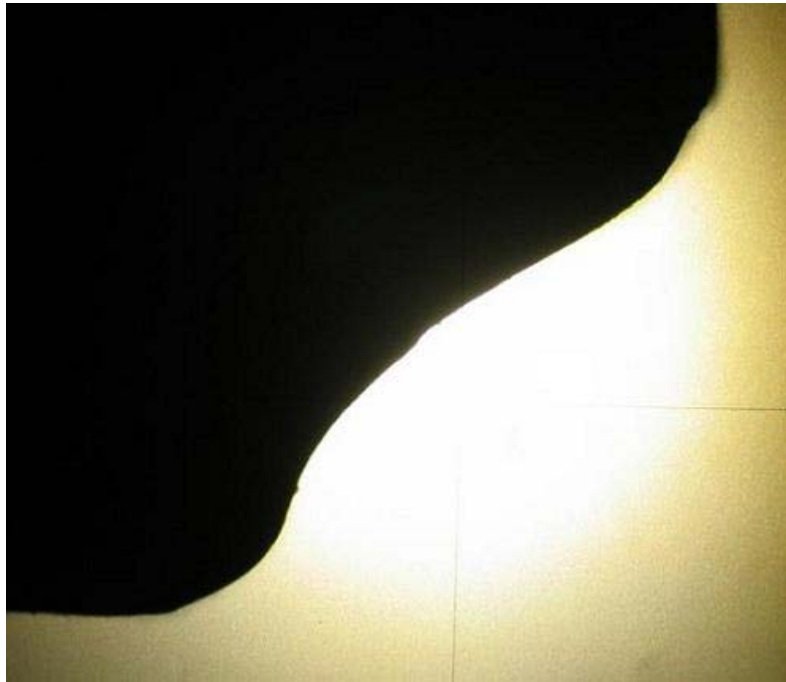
10x Magnification of Mast Arm DU Weld After UIT
